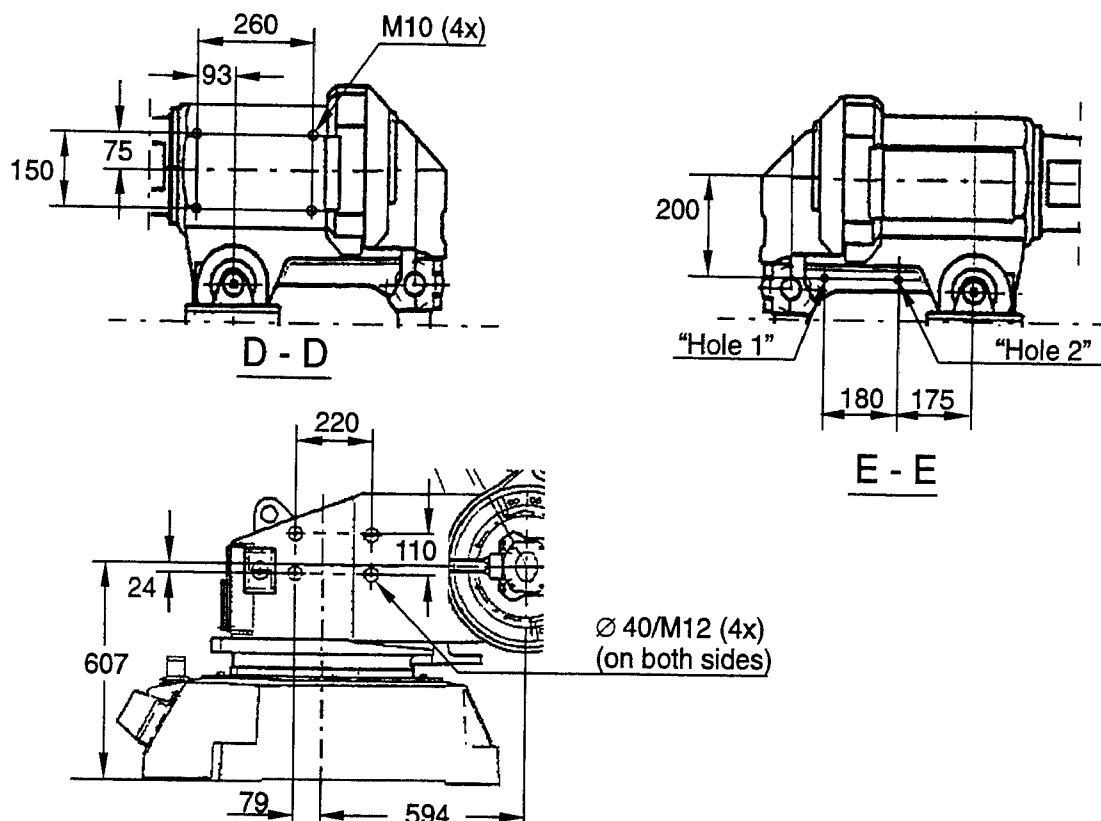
Holes for mounting of extra equipment (Dimensions in mm).
